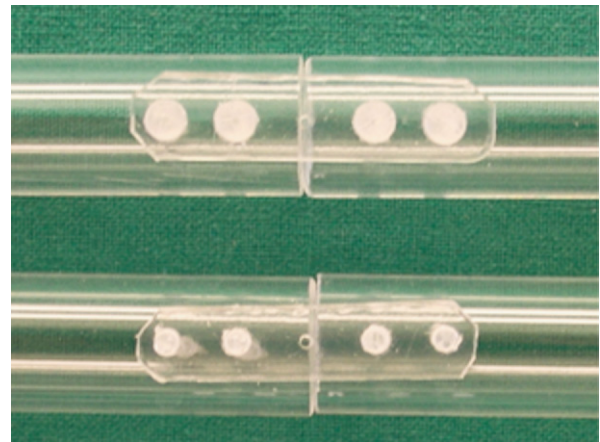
Free-form plate sample for tensile test fixed with countersunk screws (top) and fixed with screws with cut-off screw heads (bottom).
